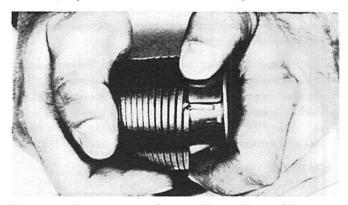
Removing and Installing Forward-Reverse Spring on Input Drum and Gear
